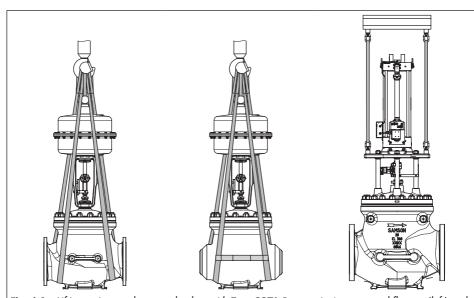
Lifting points on the control valve: with Type 3271 Pneumatic Actuator and flanges (left) and with welding ends (middle) · With piston actuator and additional lifting eyelets (right)
